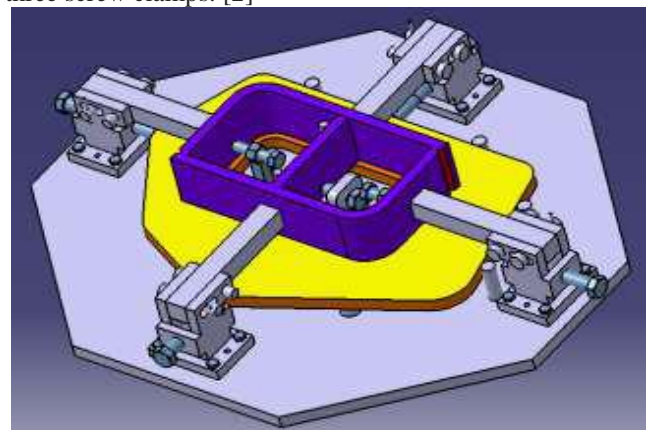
Welding Fixture for Side Bracket of Compactor
